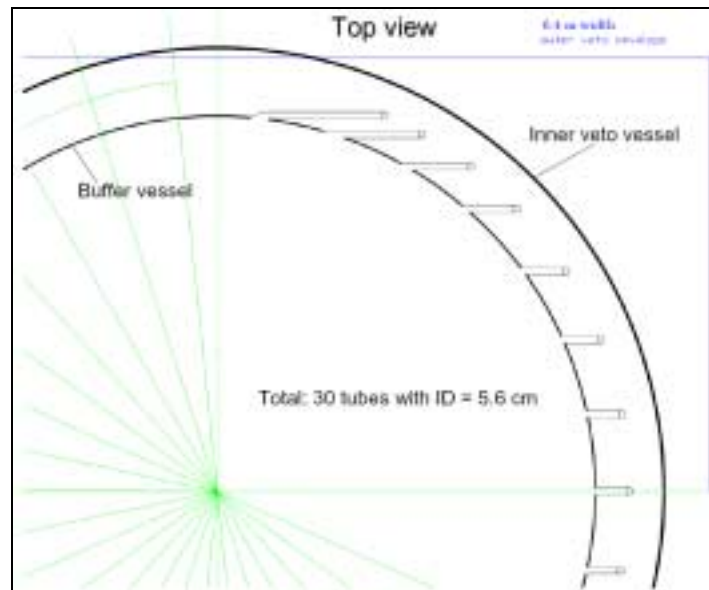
Fig.-52, Top view of the cable exit guide tubes
